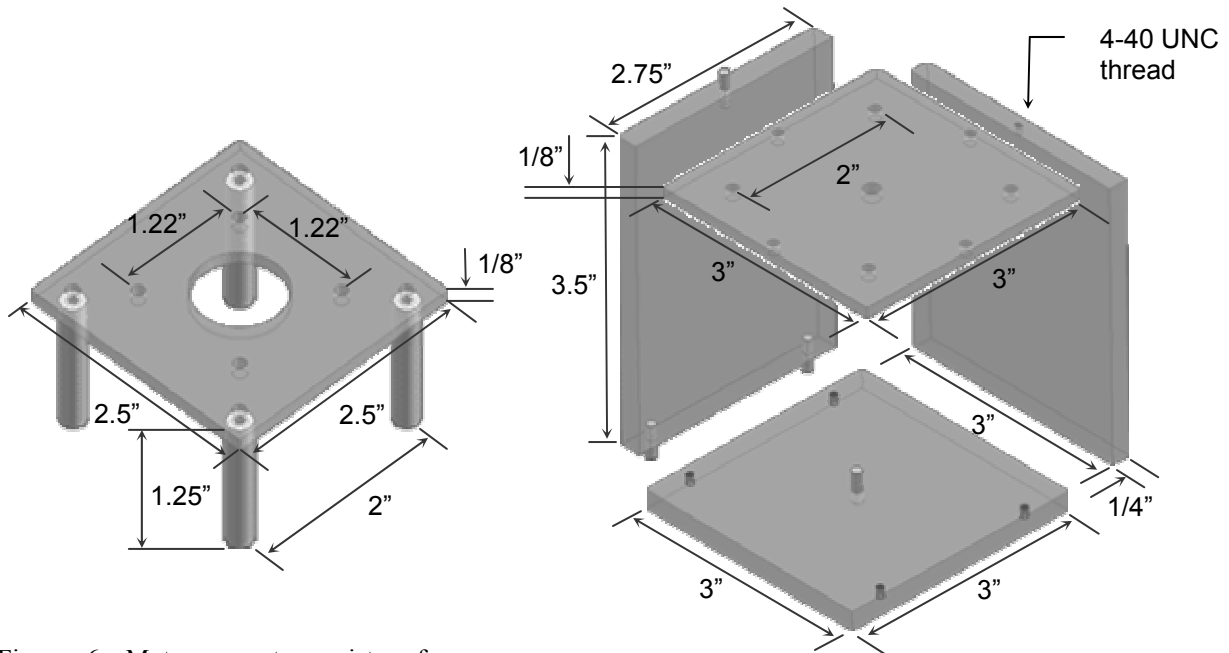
Motor mount consists of a 2.5"x2.5", $\frac{1}{8}$ "-thick, acrylic sheet and four 1.25"-high standoffs. It has a large circular opening at the center and four holes at the distance of 1.22" from each other to attach the motor.
